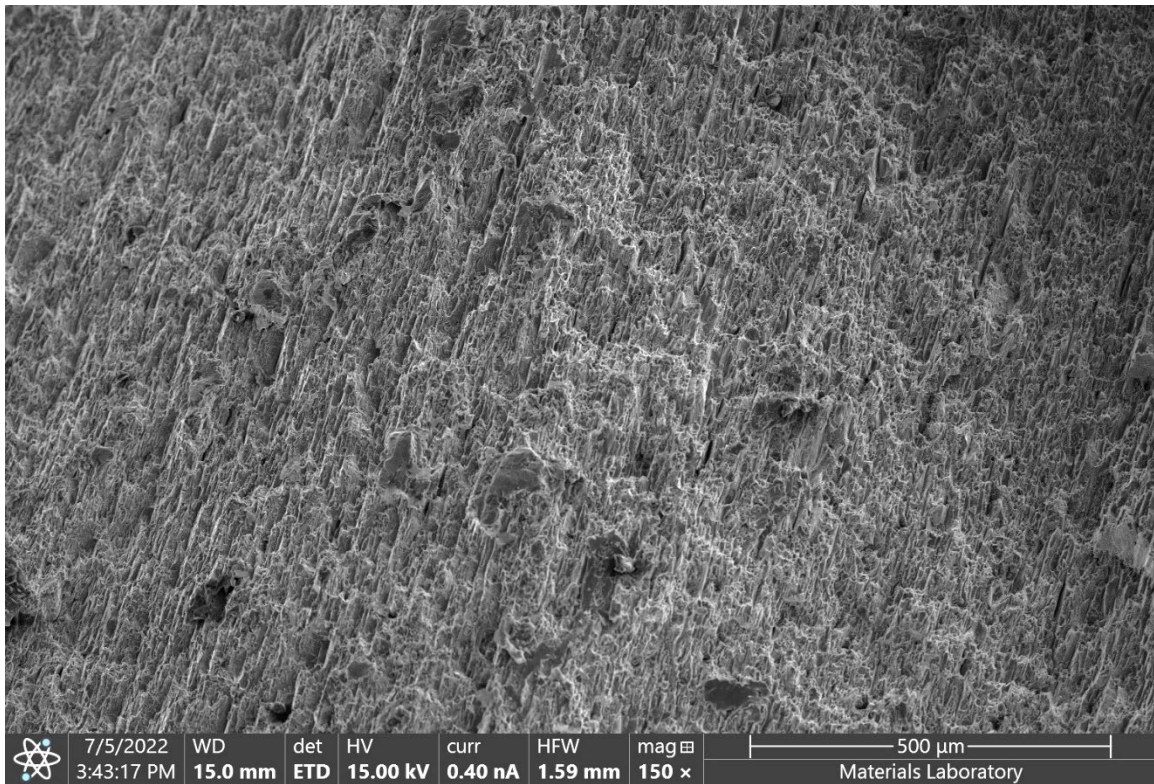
Secondary electron (SE) micrograph of the fracture surface of the non-riveted arm of the A clip fracture surface.
